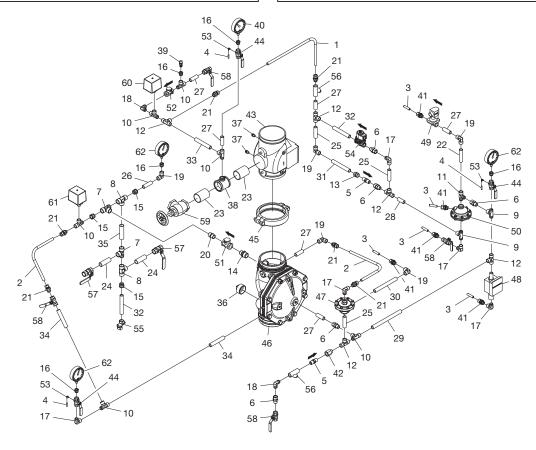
(5 OF 6) DN150 DV-5 PREACTION TYPE A TRIM ASSEMBLY EXPLODED VIEW
